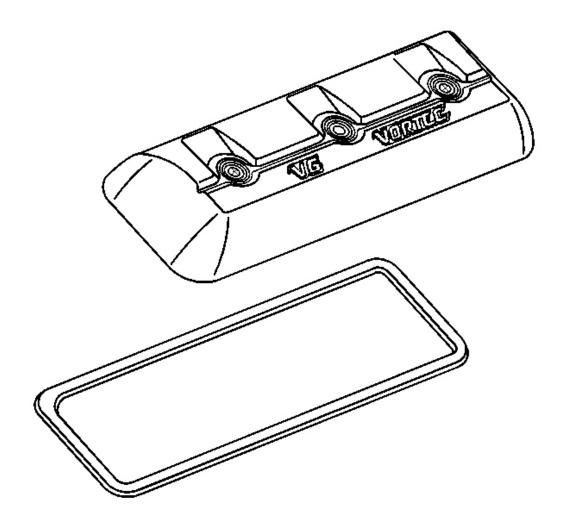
View Of Rocker Arm Cover And Gasket Courtesy of GENERAL MOTORS CORP.
